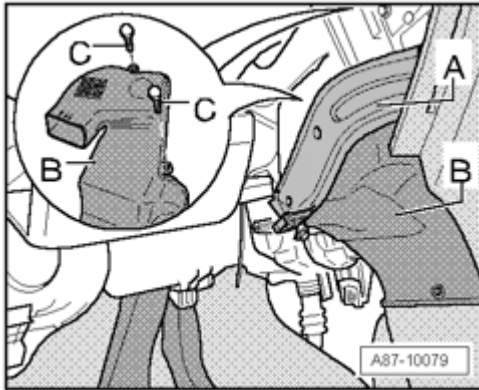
Identifying Instrument Panel, Bolts, And Footwell Vent
